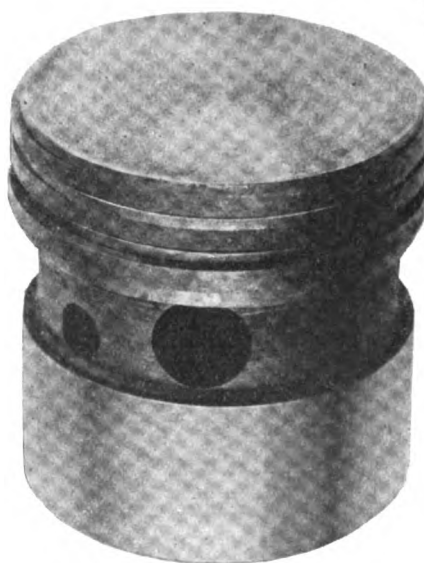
A Cadillac piston that had not enough surface above the wrist pin and below the bottom groove
